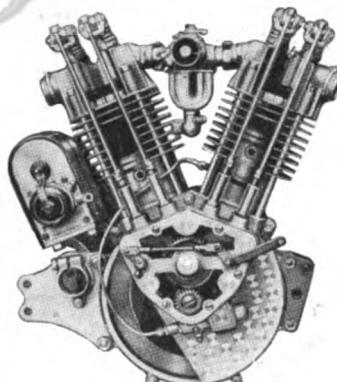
Pope Twin Motor with Overhead Inlet and Exhaust Valves
